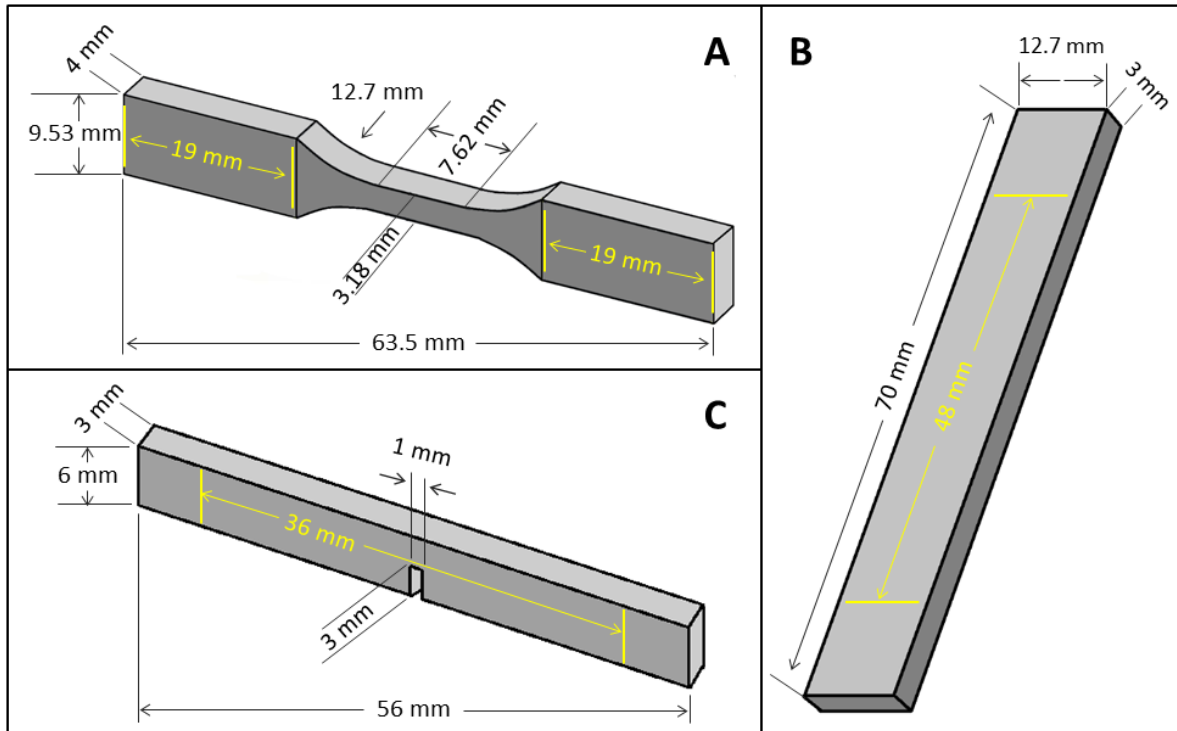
Schematics of mechanical test specimens: (A) Tensile; (B) Three-point bend; and (C) Fracture toughness.
